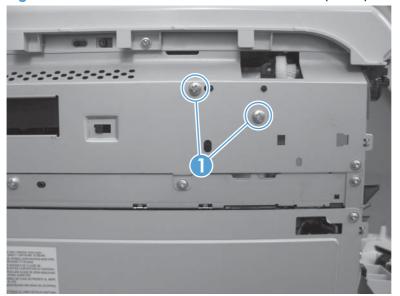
Remove the residual toner feed motor (4 of 7)
